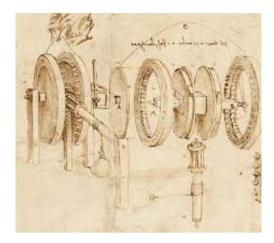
Leonardo da Vinci. Exploded view of a mechanism, n.d
